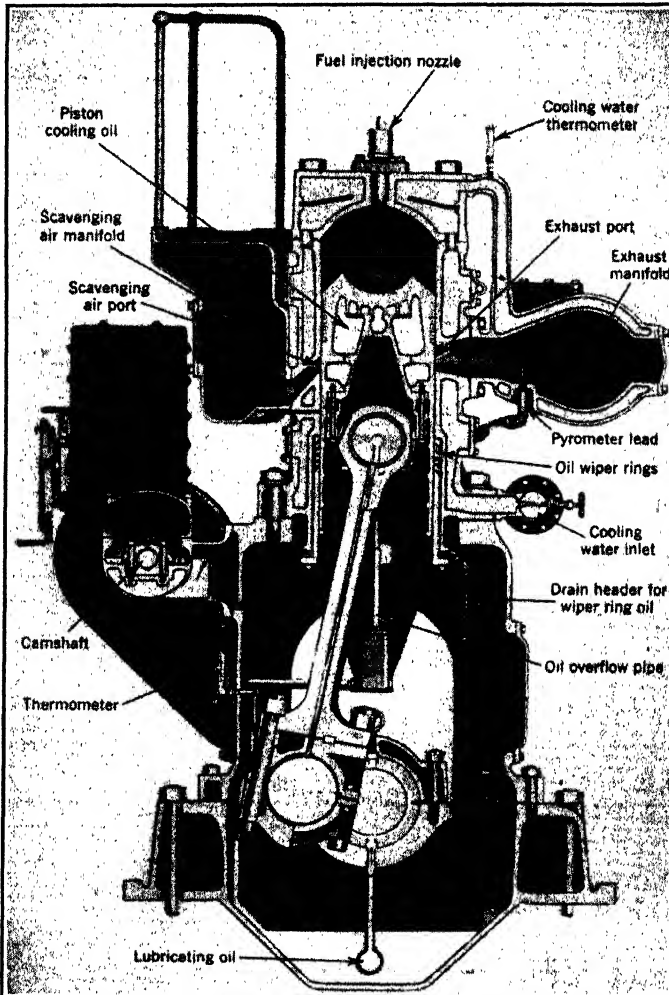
Section through cylinder of Fairbanks-Morse two-stroke cycle solid-injection Diesel Engine.
